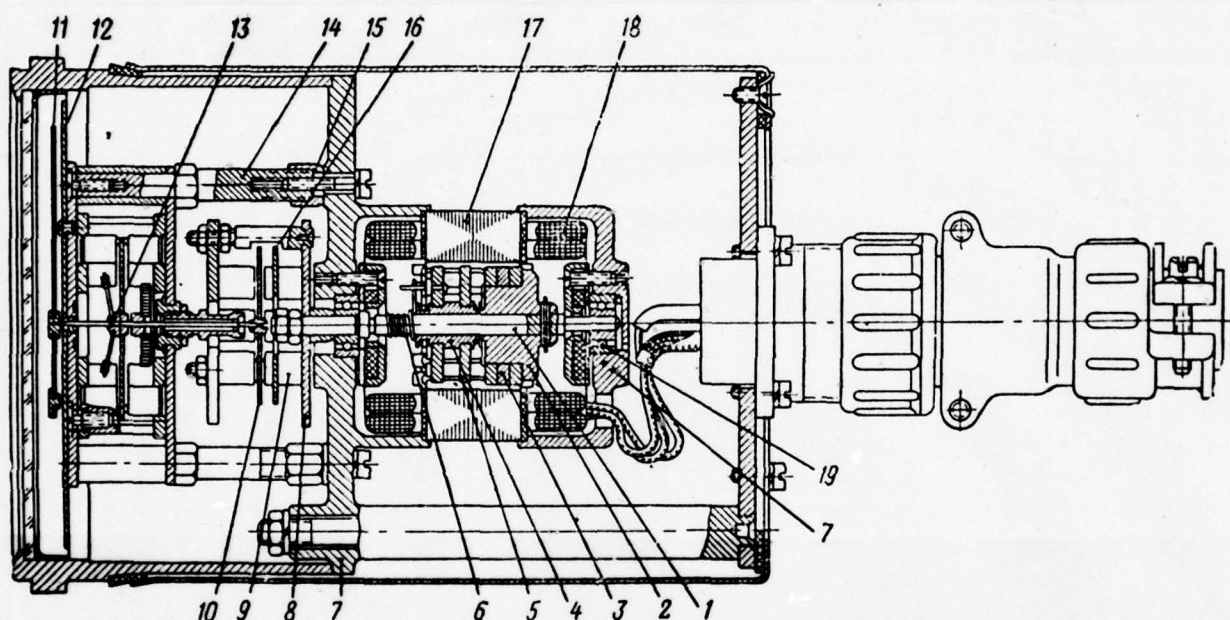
Meter of tachometer ITE-1. 1 - shaft, 2 - sleeve, 3 - the cell/elements of starting/launching (disks of hysteresis), 4. rotor, 5 - cruciform magnets, 6 - spring, 7 - cap/cover, 8 - magnetic assembly, 9 - the permanent magnets, 10 - sensing element, 11 - rifleman/gunner, 12 - the scale, 13 - axle/axis, 14 - strut, 15 - adjusting nuts, 16 - shunt, 17 - stator, 18 - three-phase winding, 19 - ball bearings.
